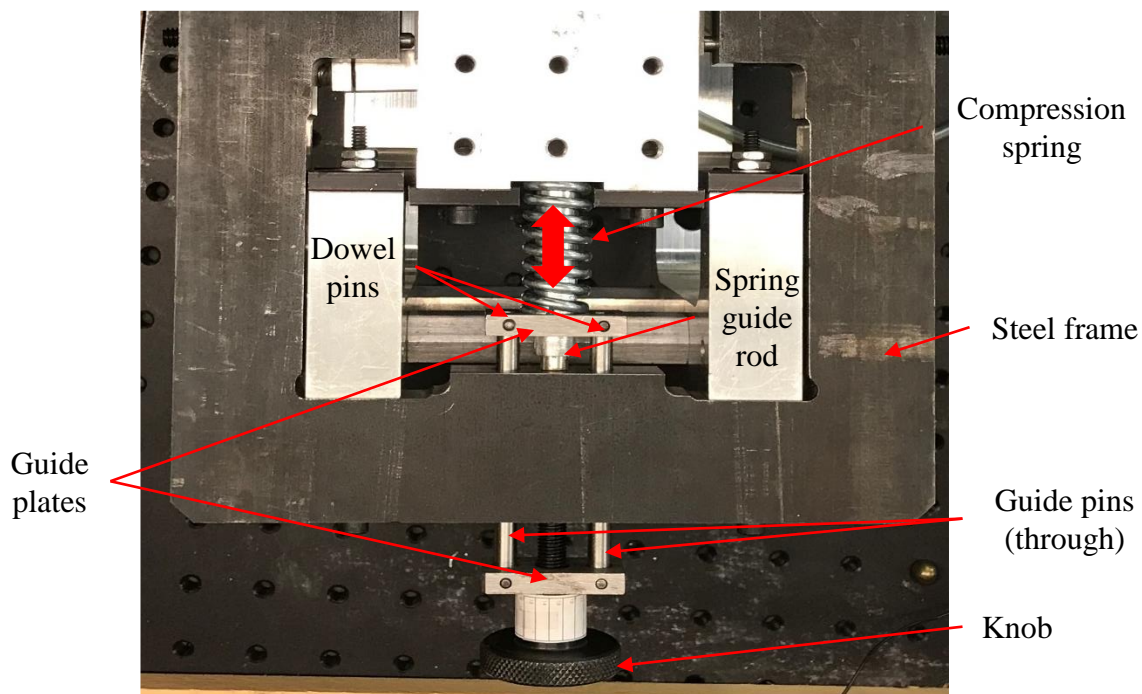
Preload structure assembled using knob, plates, guide pines, compression spring, and guide rod.
